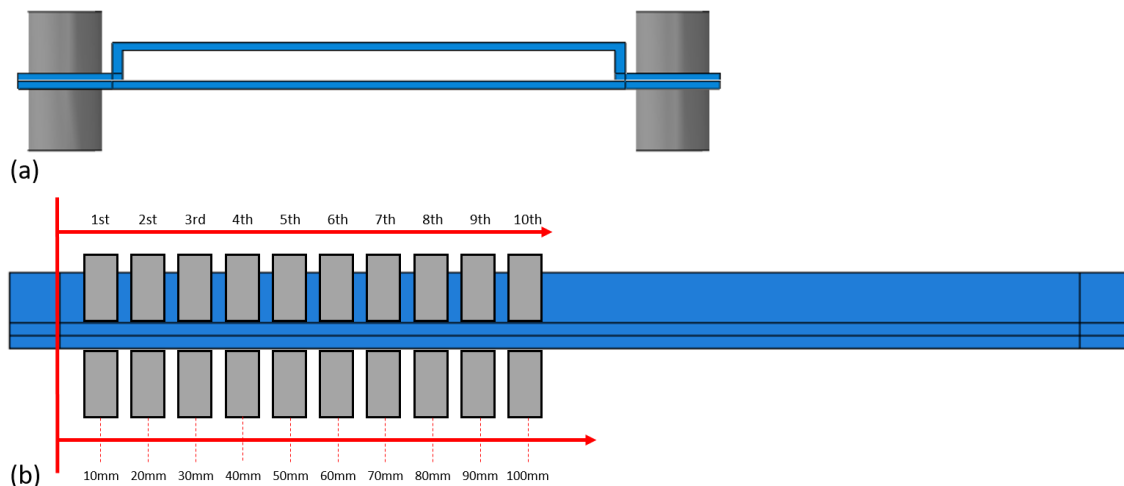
Selected joining configuration for dynamic response analysis: (a) Lateral view, (b) Front view. A U-shaped CFRP part will be joined to a flat CFRP part by 10 welding spots on each side. The initial welding design includes a 10mm distance between the welding spots, ordered from 1 to 10 starting from the one end of the parts. The horn diameter is 18mm. The flange of the U-shaped part has 23 mm.
